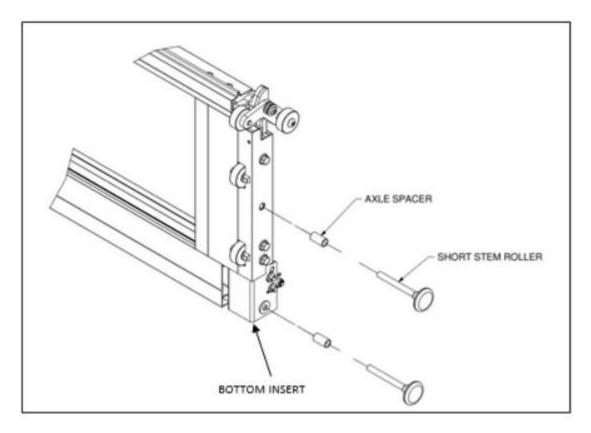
BOTTOM SECTION WITH RIGHT-HAND END STILE DETAIL.
